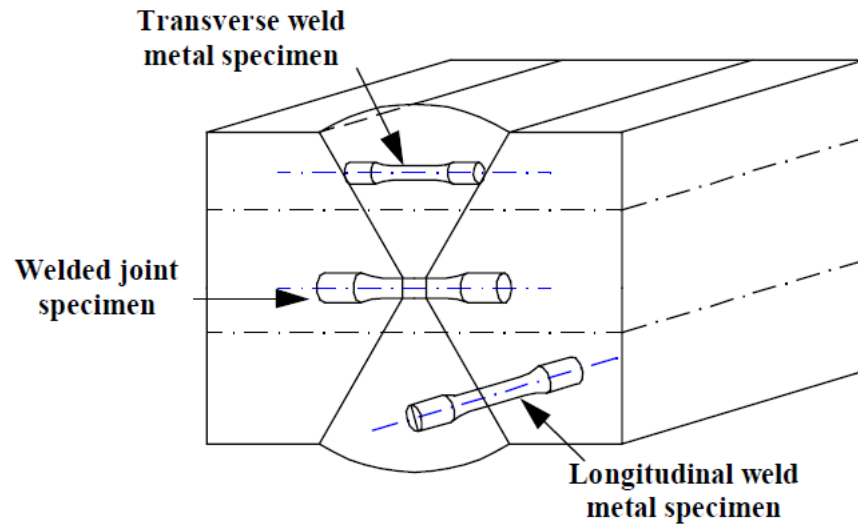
Weldment fatigue specimen type (Madi et al., 2004)
